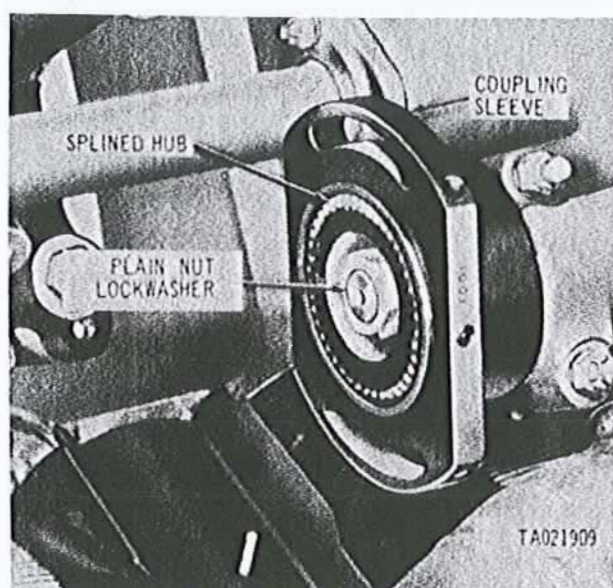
Removing or installing fuel injection pump coupling from gearshaft.
